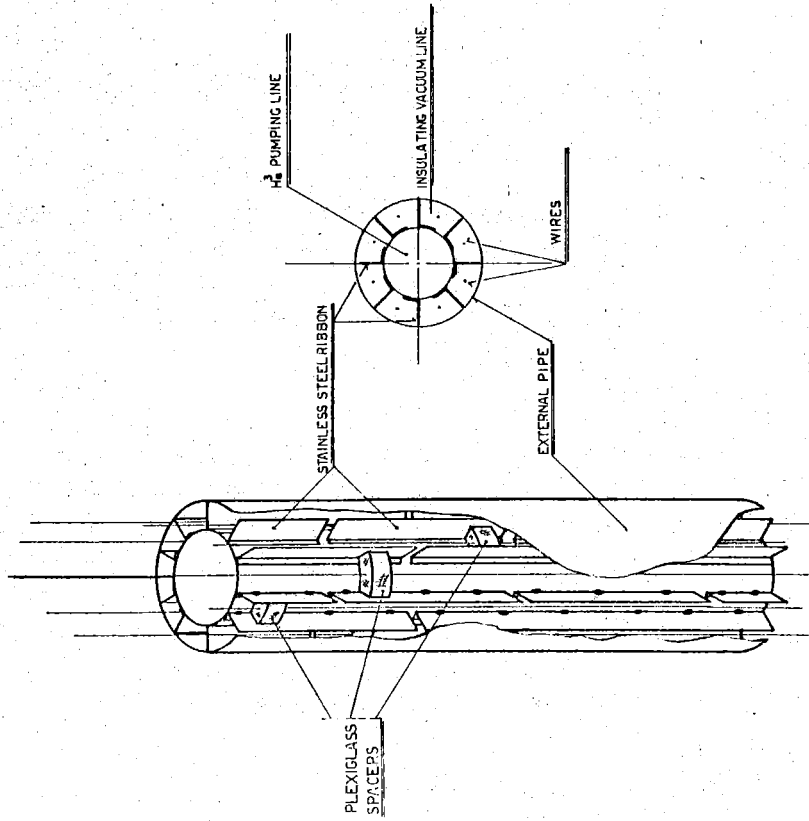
This shows a shielded multiple cable, containing eight leads, which are shielded from each other and from the outside. Plexiglass spacers ensure proper positioning of the leads. The L-shaped stainless steel ribbon, which act as the shield between the leads, is soft soldered to the internal tube at various points; it is made of short pieces (≈ 8 cm long) in order to reduce thermal conduction. The external tube is completely independent of the rest of the assembly; it can be easily mounted and dismantled, since it is coupled to the rest of the cable by only one O-ring system at room temperature. The external pipe constitutes the insulating-vacuum case for a He³ refrigerator. This system has the advantage that it does not require any electrically insulated vacuum seal between the He⁴ bath and the insulating-vacuum space.
